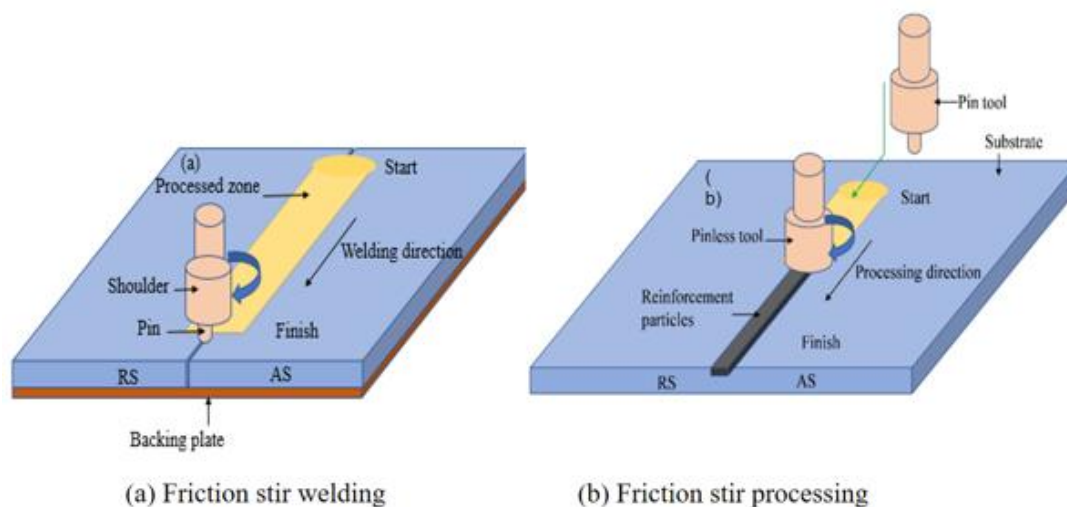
(a) Friction Stir Welding, (b) Friction Stir Processing
